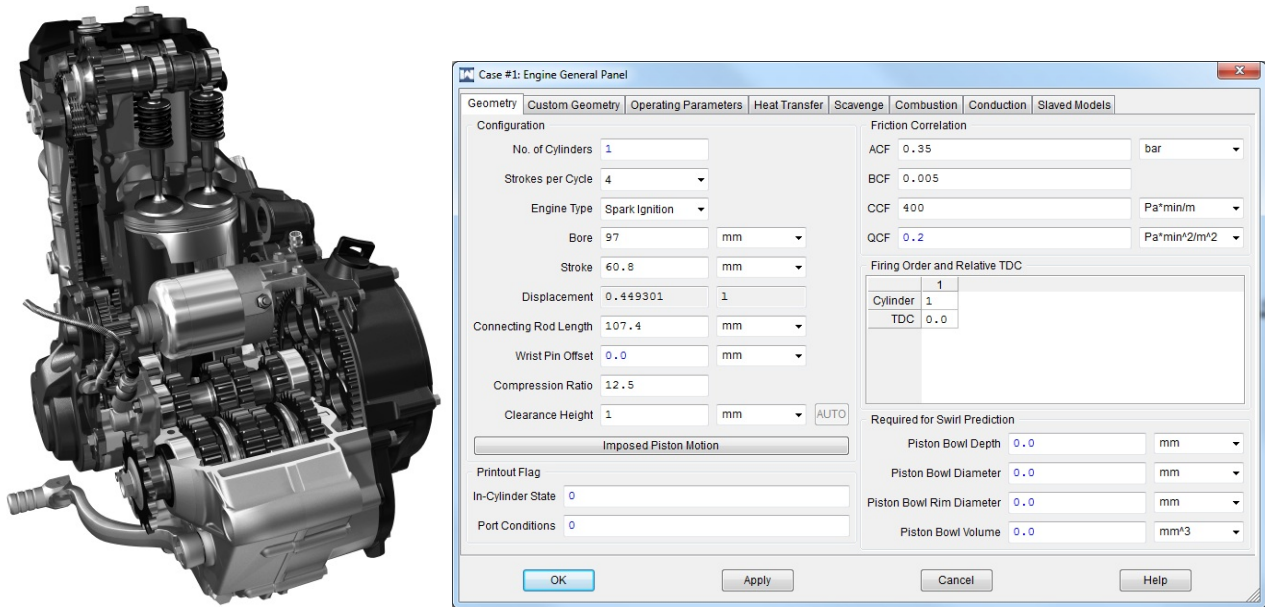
Cross-section view of the KTM SX-F engine and the engine configuration setting panel as shown in Wave.
